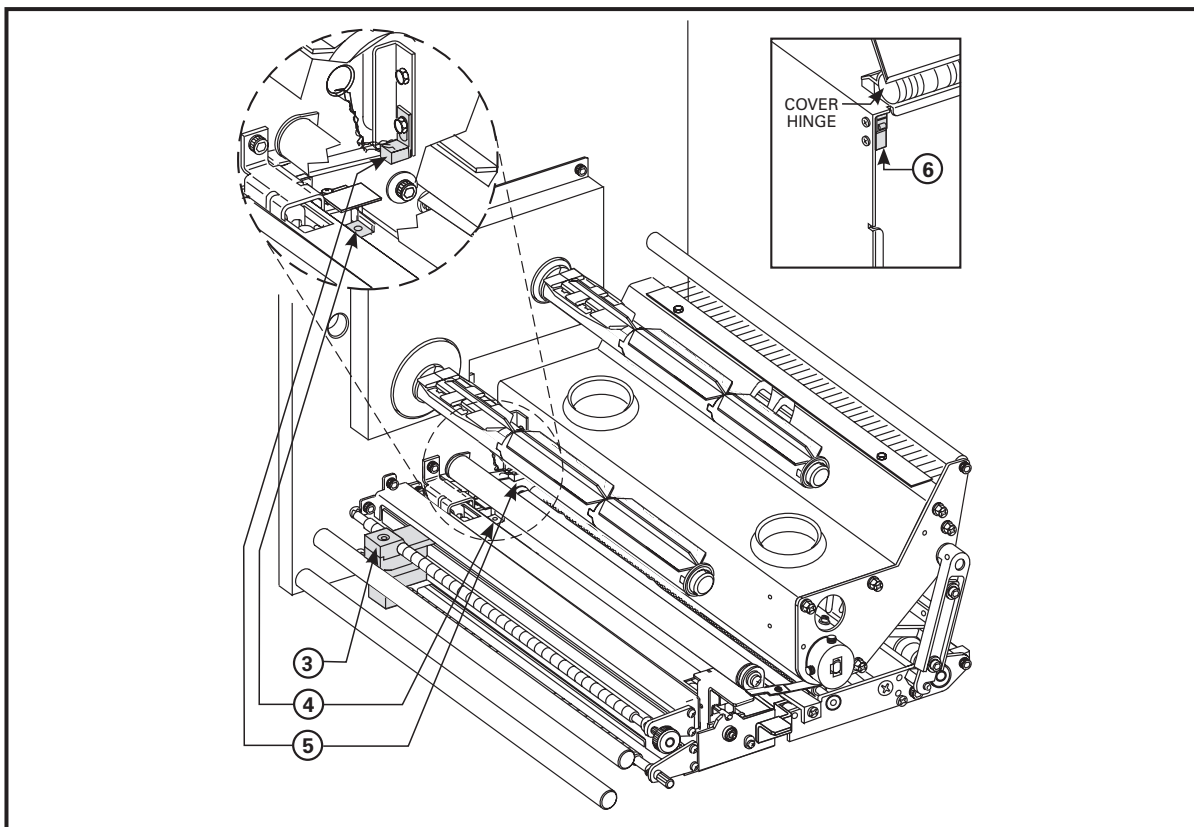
Sensor Locations (Right-Hand Unit Shown)
